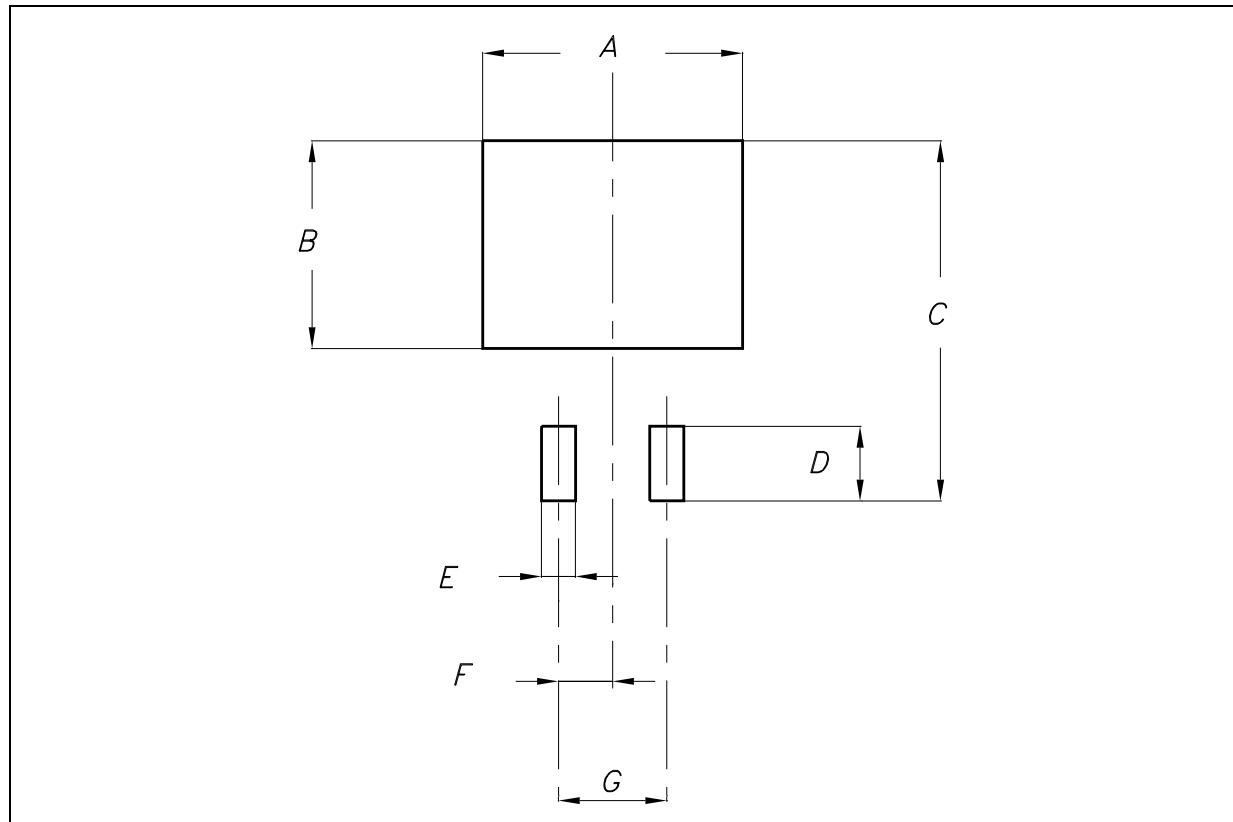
Drawing dimension D²PAK (type WOOSEOK-SUBCON.)
